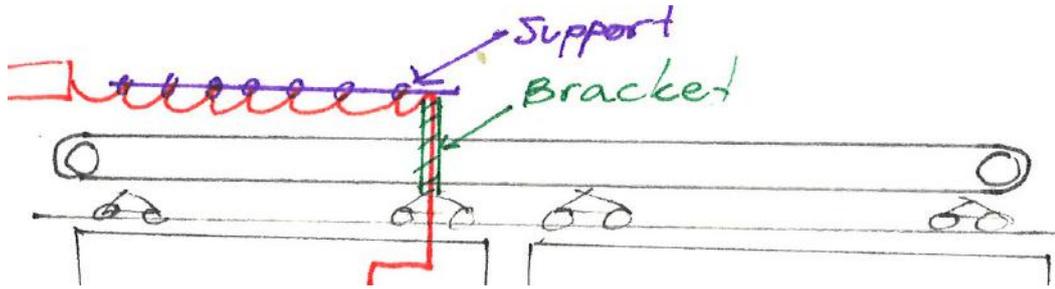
Concept 12 - Cable festoon. A festoon system where a cable is mounted on many cable trolleys that runs on a support mounted in the header profile. As the door opens the cable gathers in loops in between the cable trolleys.
